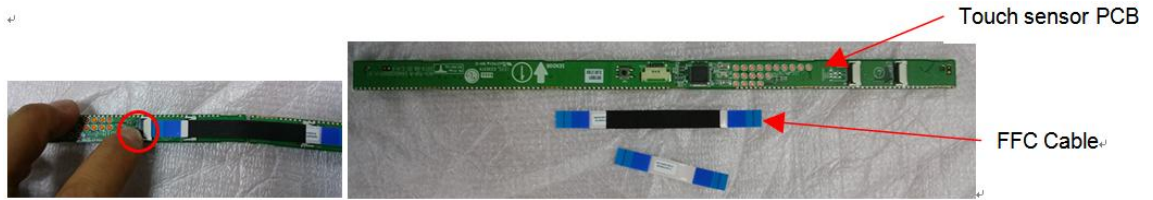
Disconnect FFC Cable from wafer of Touch PCB
